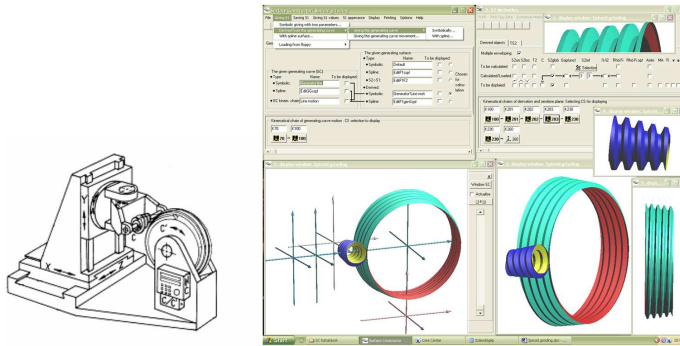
Grinding of spiroid worm needs special grinding machine and wheel
